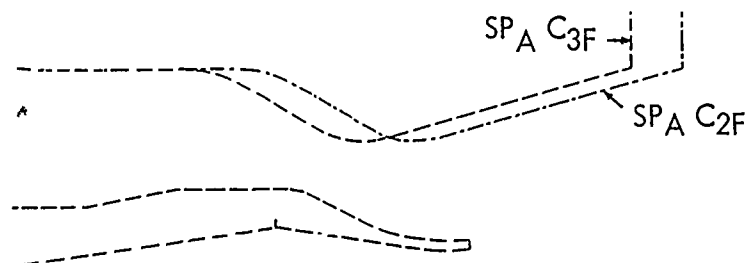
Model Nozzle Designs (Sheet 2 of 2)
